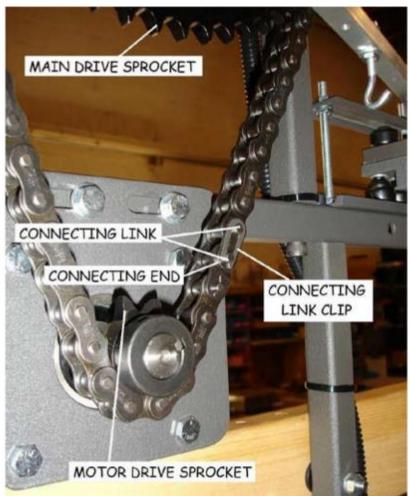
Main Drive Sprocket with motor and chain (Interior View)
